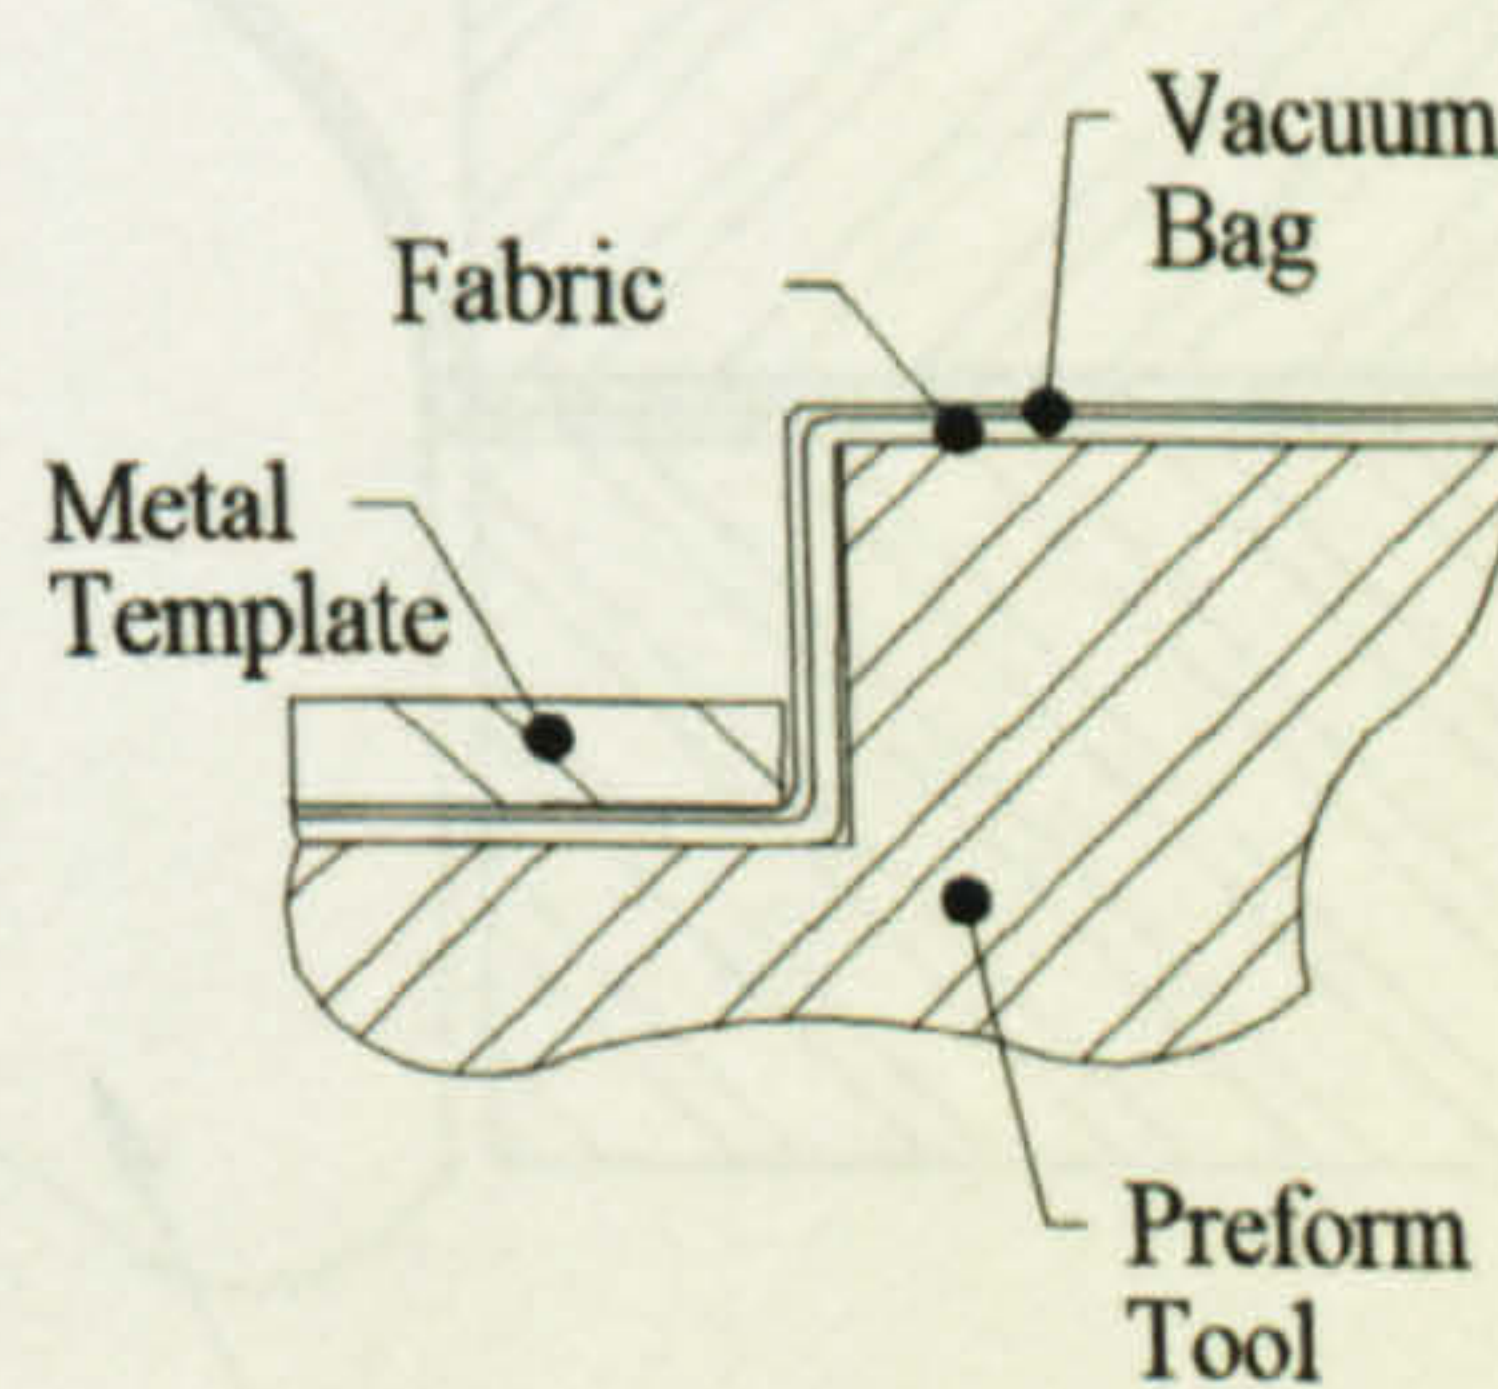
Vacuum assisted preforming equipment for disc geometry.
